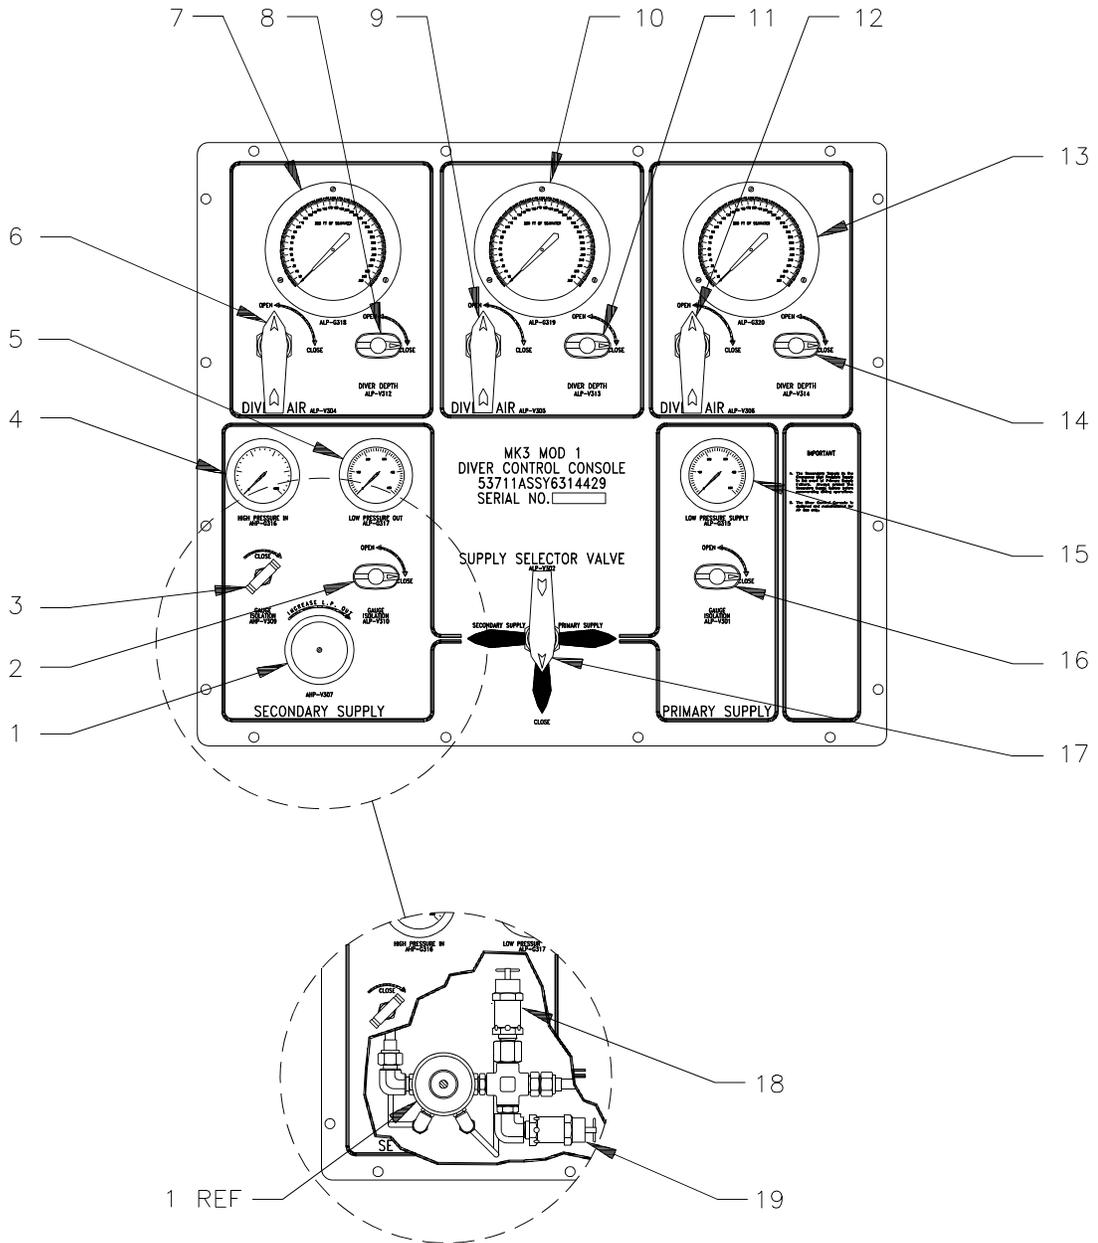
LWDS MK 3 Mod 1 Control Console Assembly
